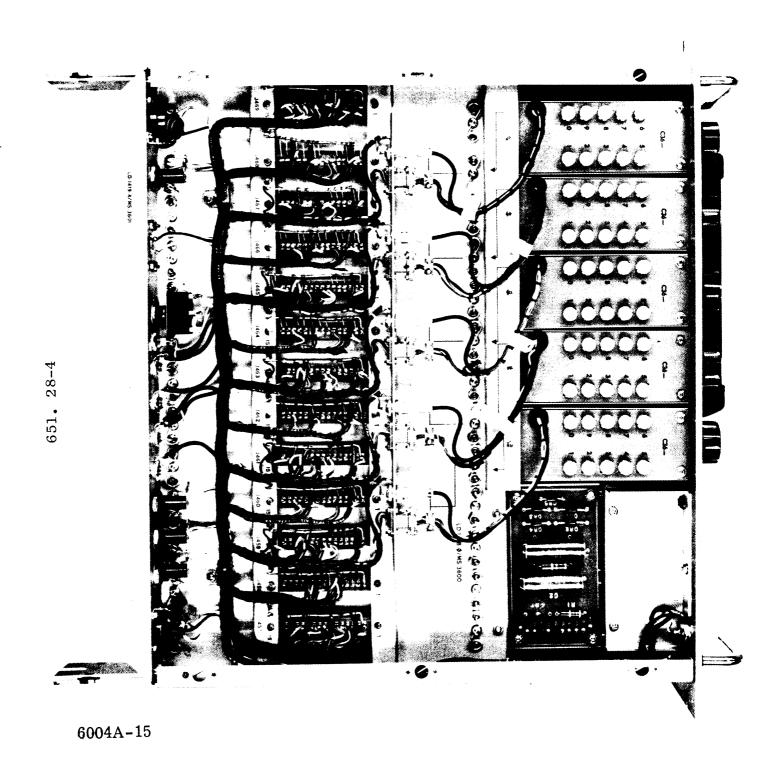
LFSA Sythesizer, Parts Location, Bottom View
